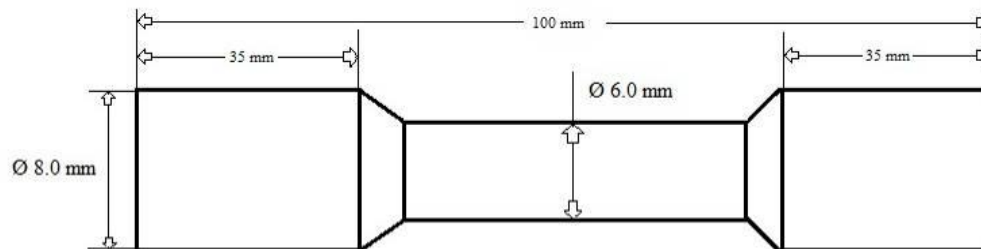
Specimen used for Tensile Test and Fatigue Test
